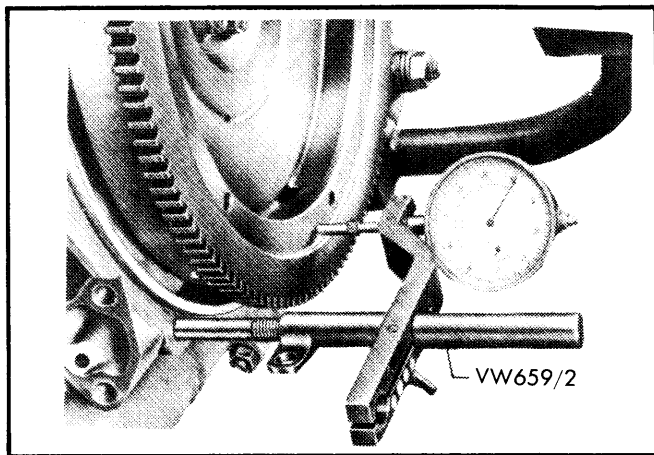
Checking Crankshaft End Play with Dial Gauge
